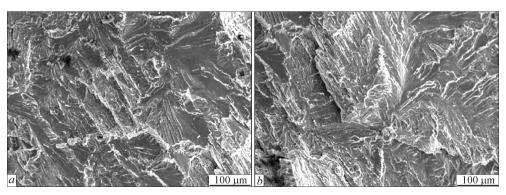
Fractogram of fracture surface of weld of a sample of 3 mm thick Ti–44Al–5Nb–3Cr–1.5Zr, at.% intermetallic alloy: a — weld structure (face side), $\times 200$; b — fracture area with elongated lamellas on the reverse side, $\times 200$
